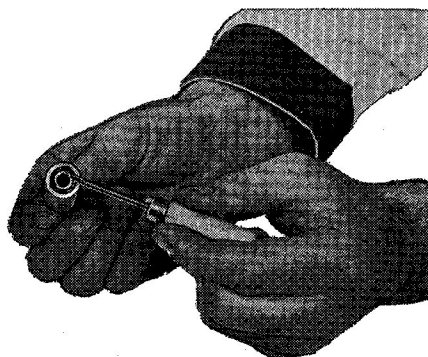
Clean annular groove in top of nozzle by using pressure chamber tool as shown.
